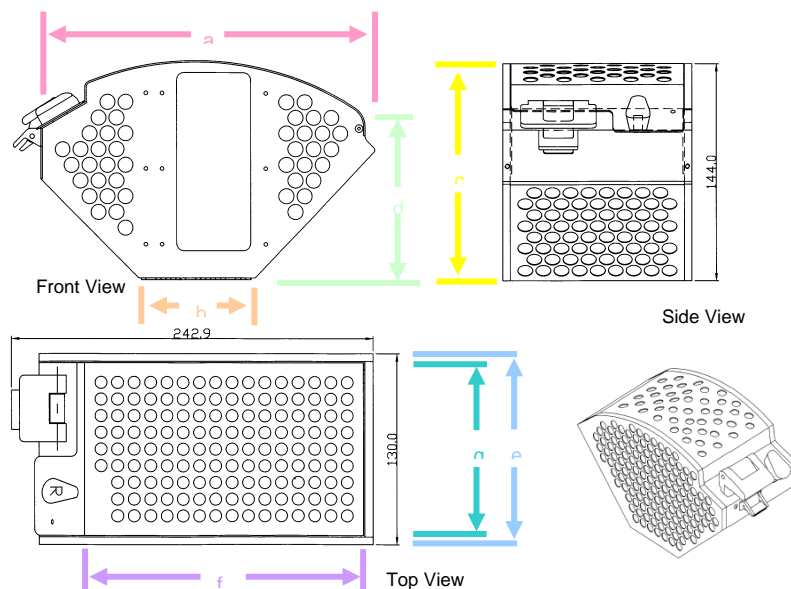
BOX MODULE DIMENSIONS
